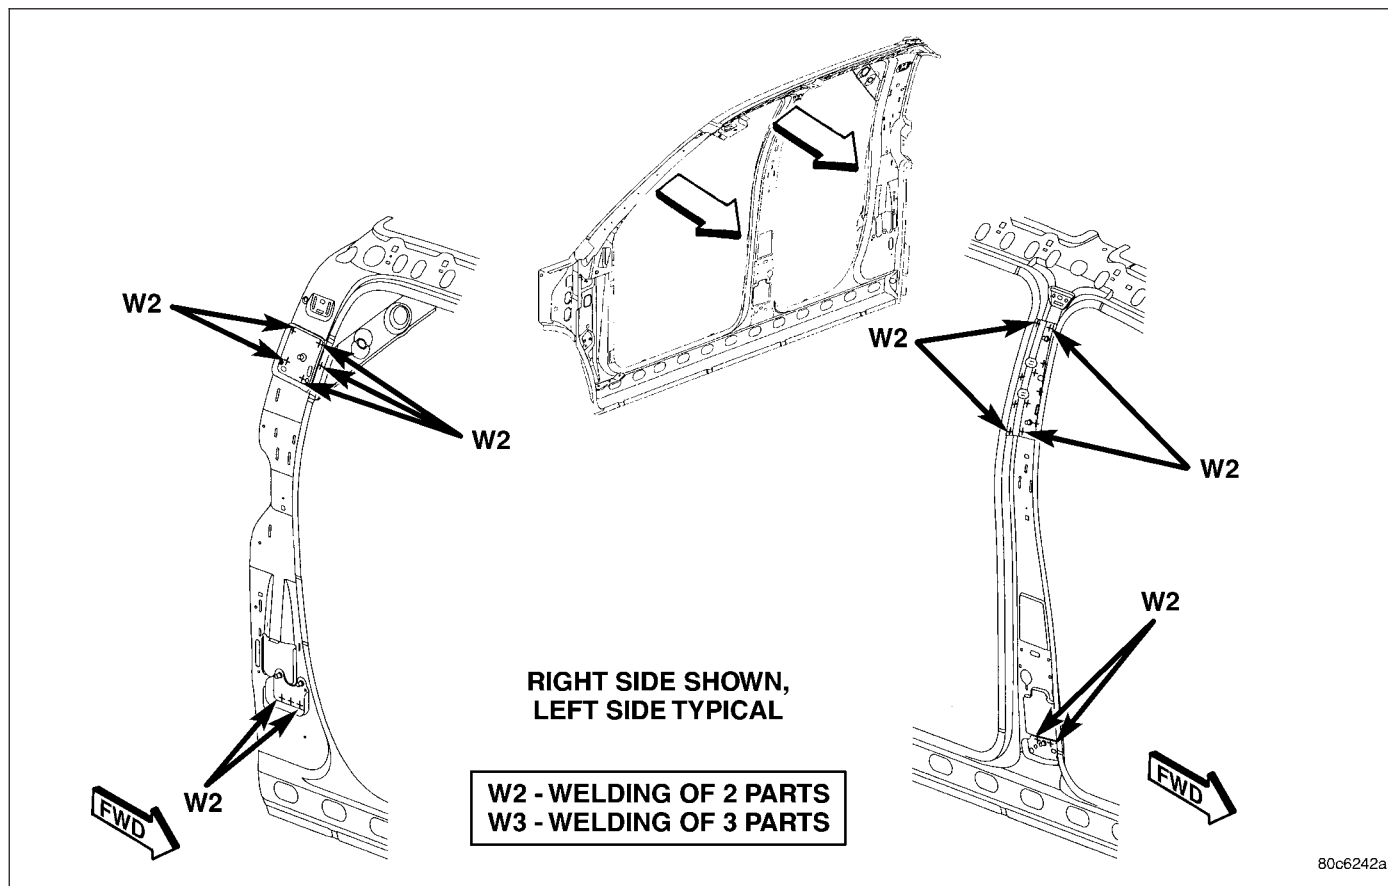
SEAT BELT MOUNTING PLATES - QUAD CAB
